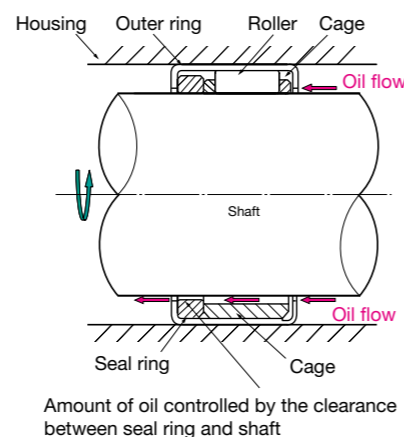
Features of the thin cross-section, drawn-cup needle roller bearing with seal ring ¹⁾
